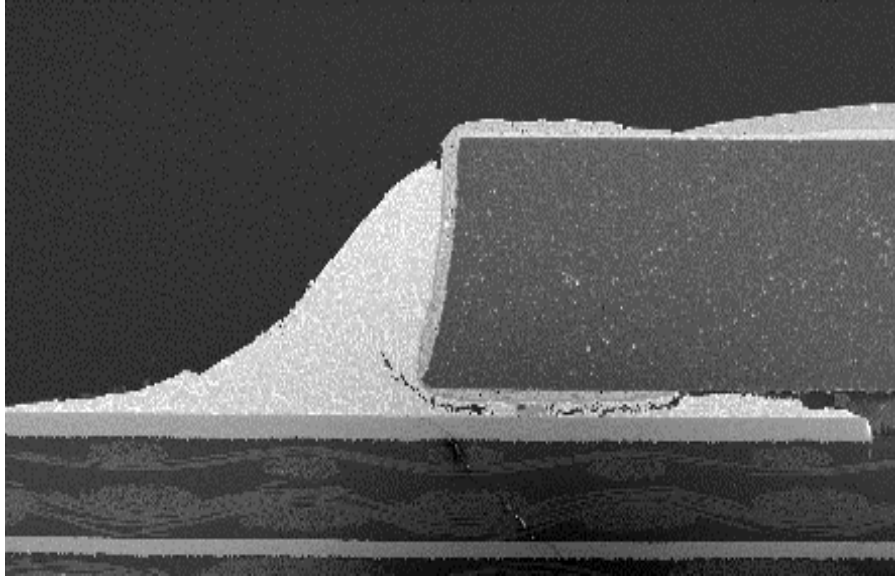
Typical Image of Crack Initiation and Propagation of 2512 Chip Resistor Solder Joint.
